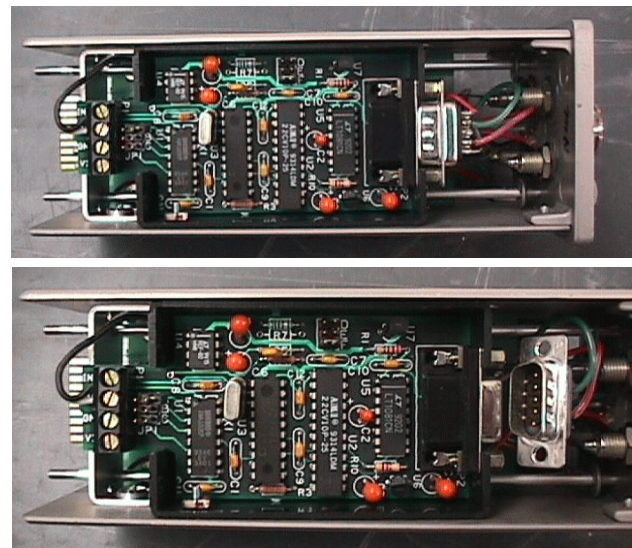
The DI-130 A/D module installed in the X-Y Output Module. Top photograph is with the 9-pin D-shell plug connected to the DI-130. Bottom is with it unplugged.
